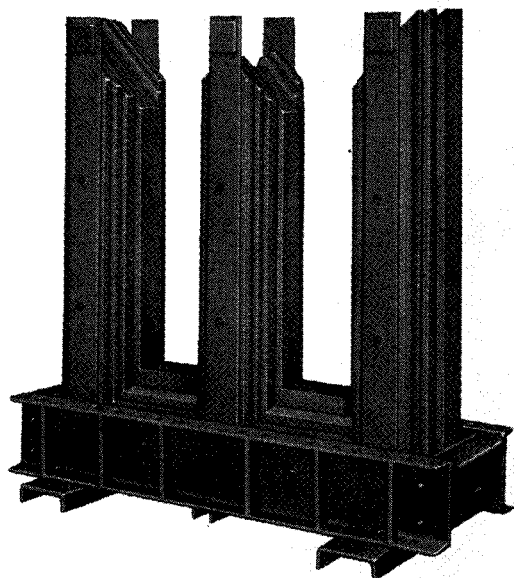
Partial Hipersil Core Assembly For a Three-Phase Transformer.
